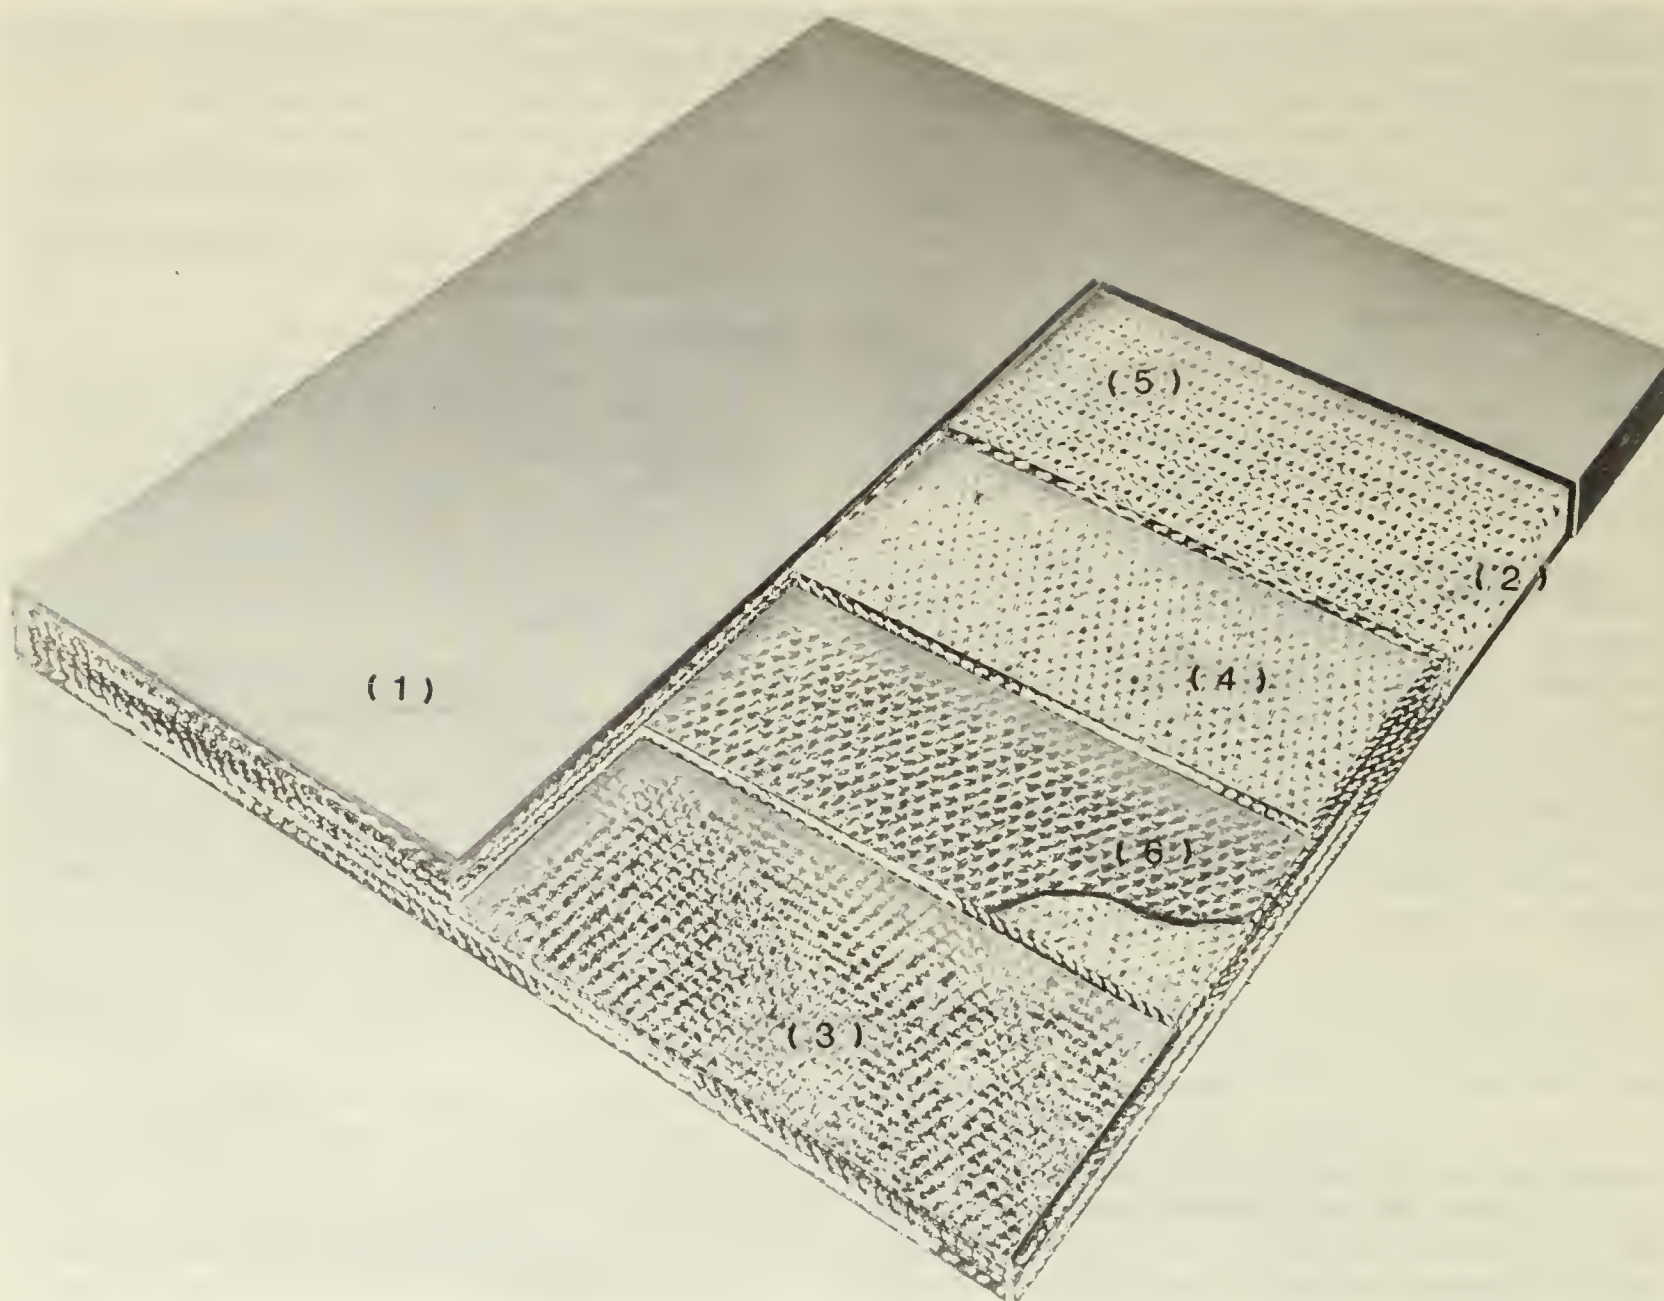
Cross Section of Conveyor Belting Construction.
